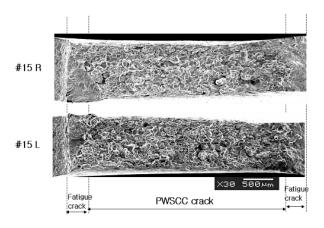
Photographs of the fracture surfaces for the HTMA Alloy 600 tube.
